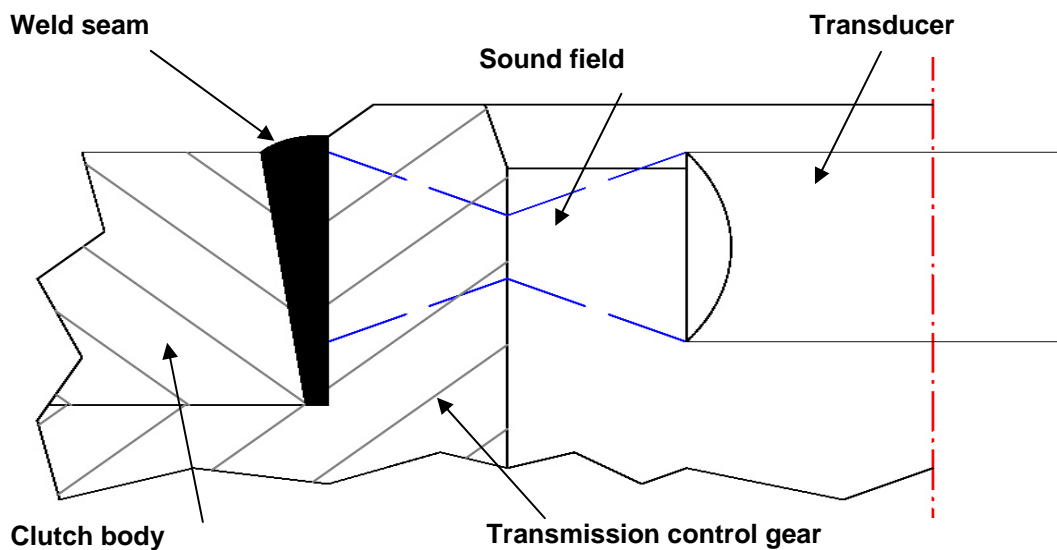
Cross-section through the weld seam, arrangement of transducer and beam direction
